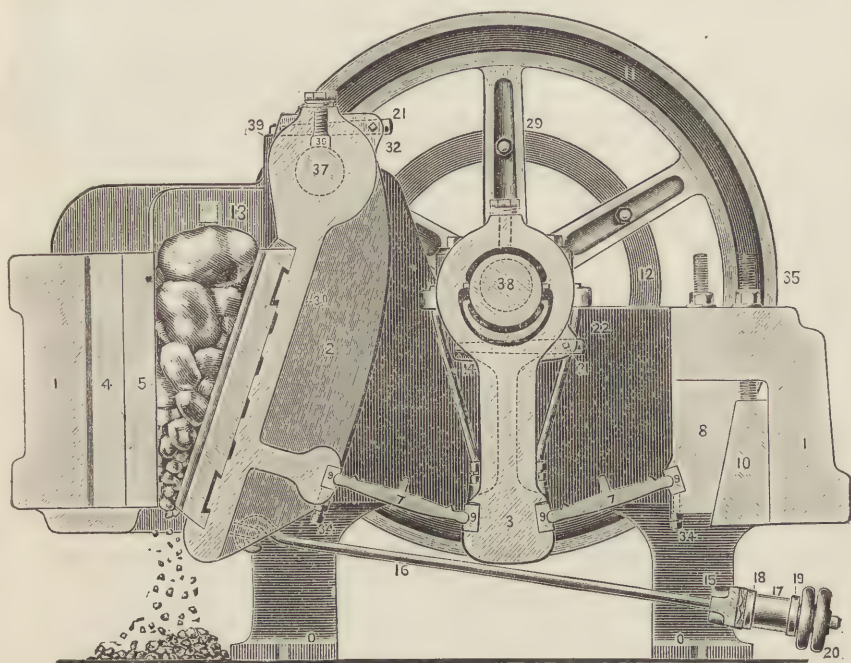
SECTIONAL VIEW OF FARREL MARSDEN STONE CRUSHER.
